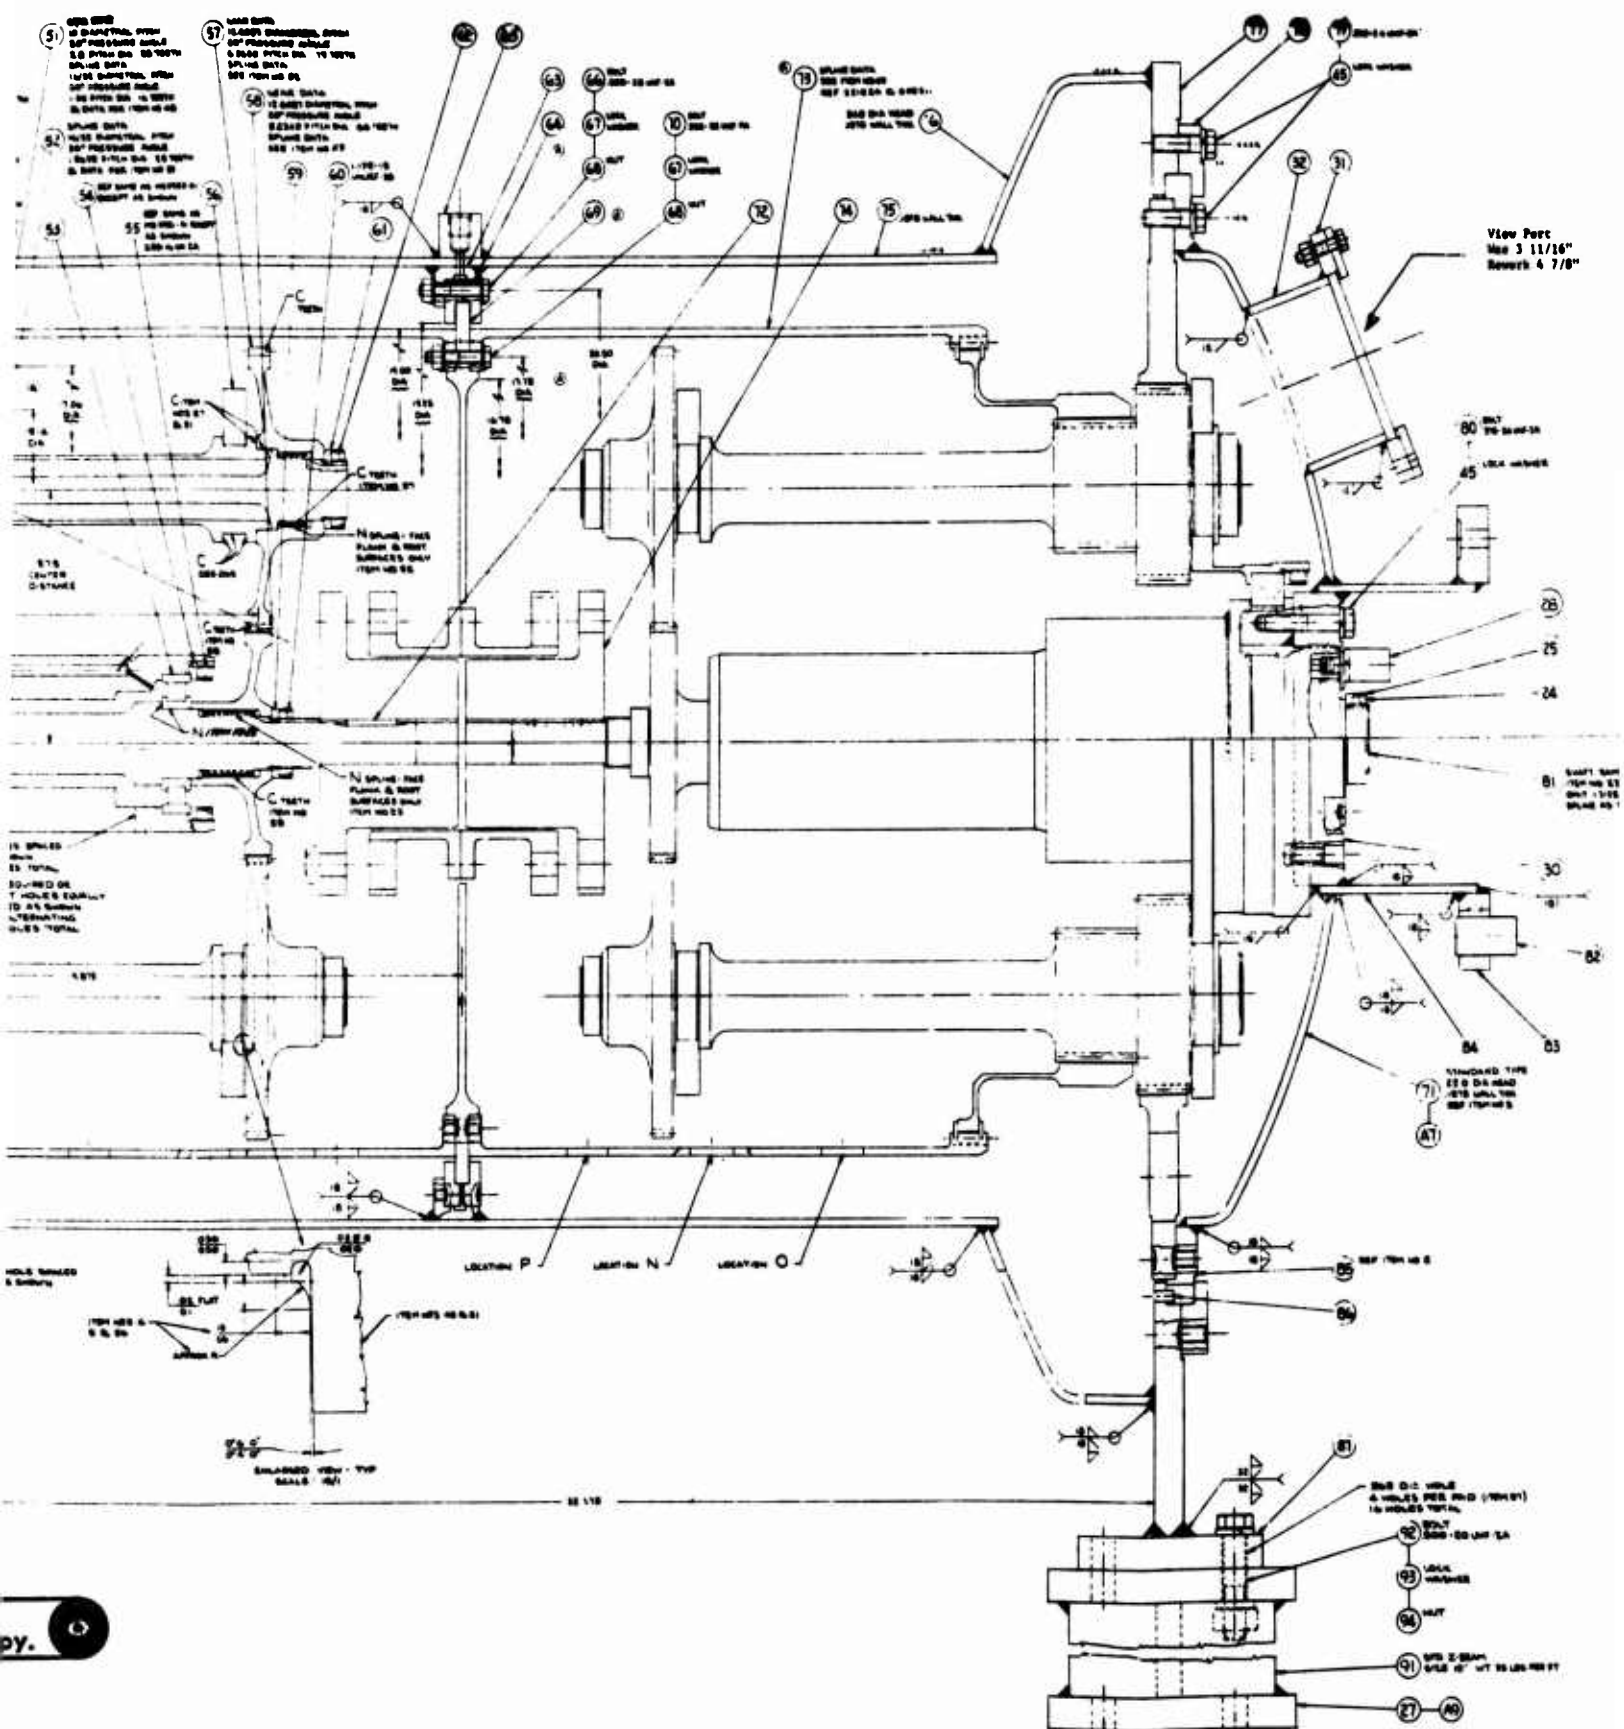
shows the basic FP500 layout, and Figure 2 shows the revisions to make the FP501 layout drawing. Each of these configurations utilizes five planet spindles.
